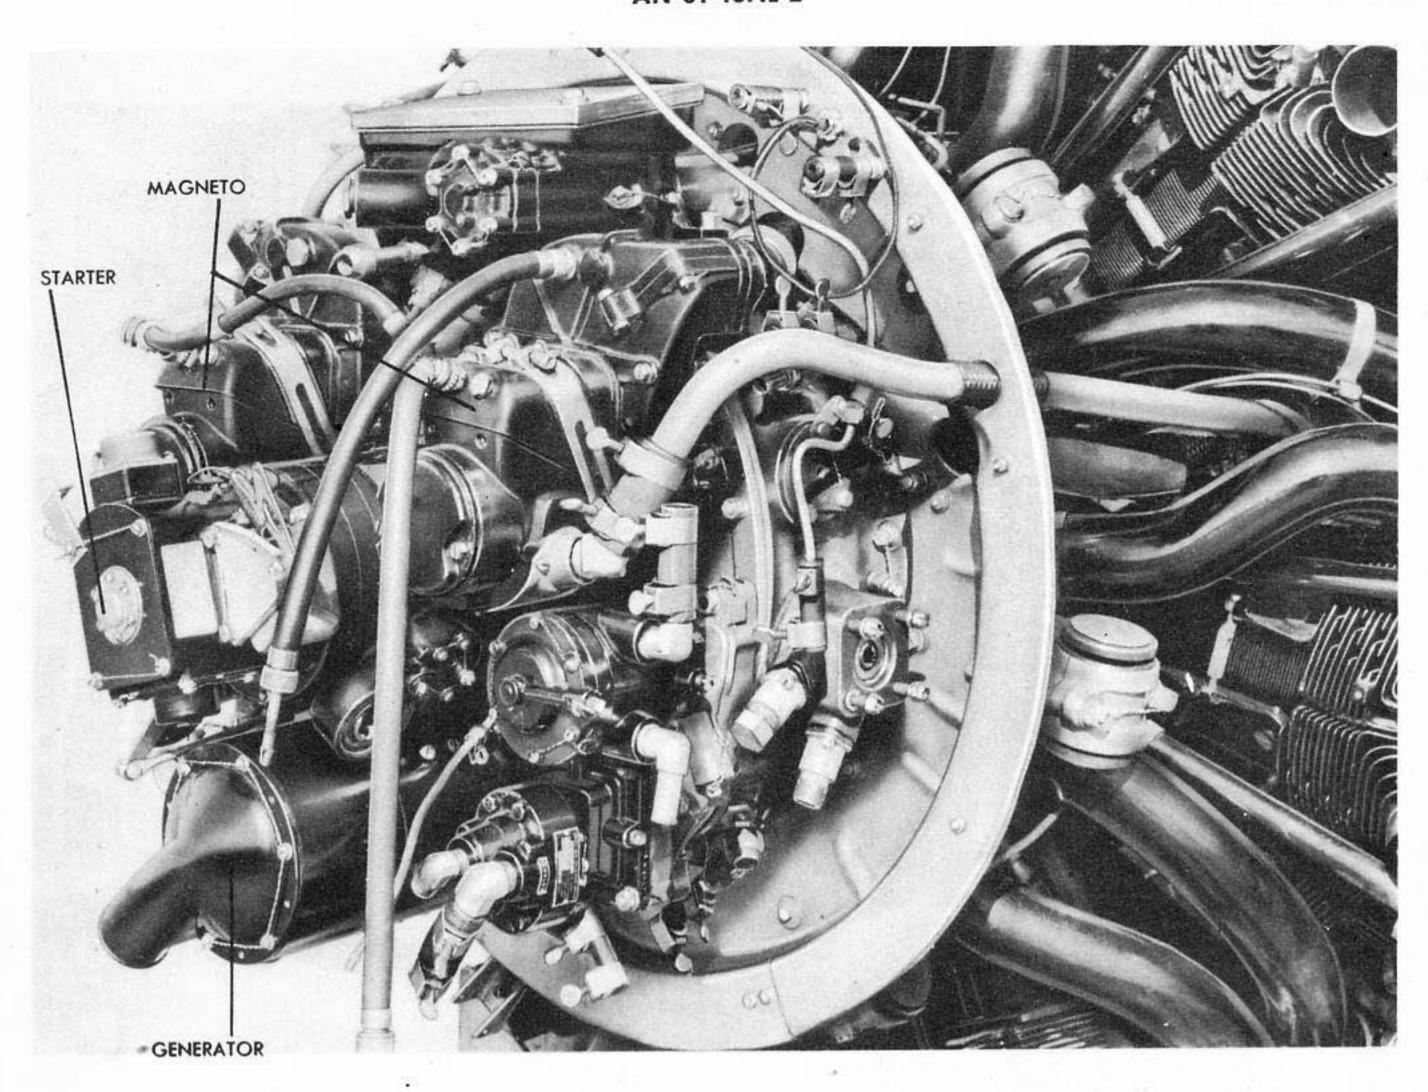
ENGINE ELECTRICAL ACCESSORIES
